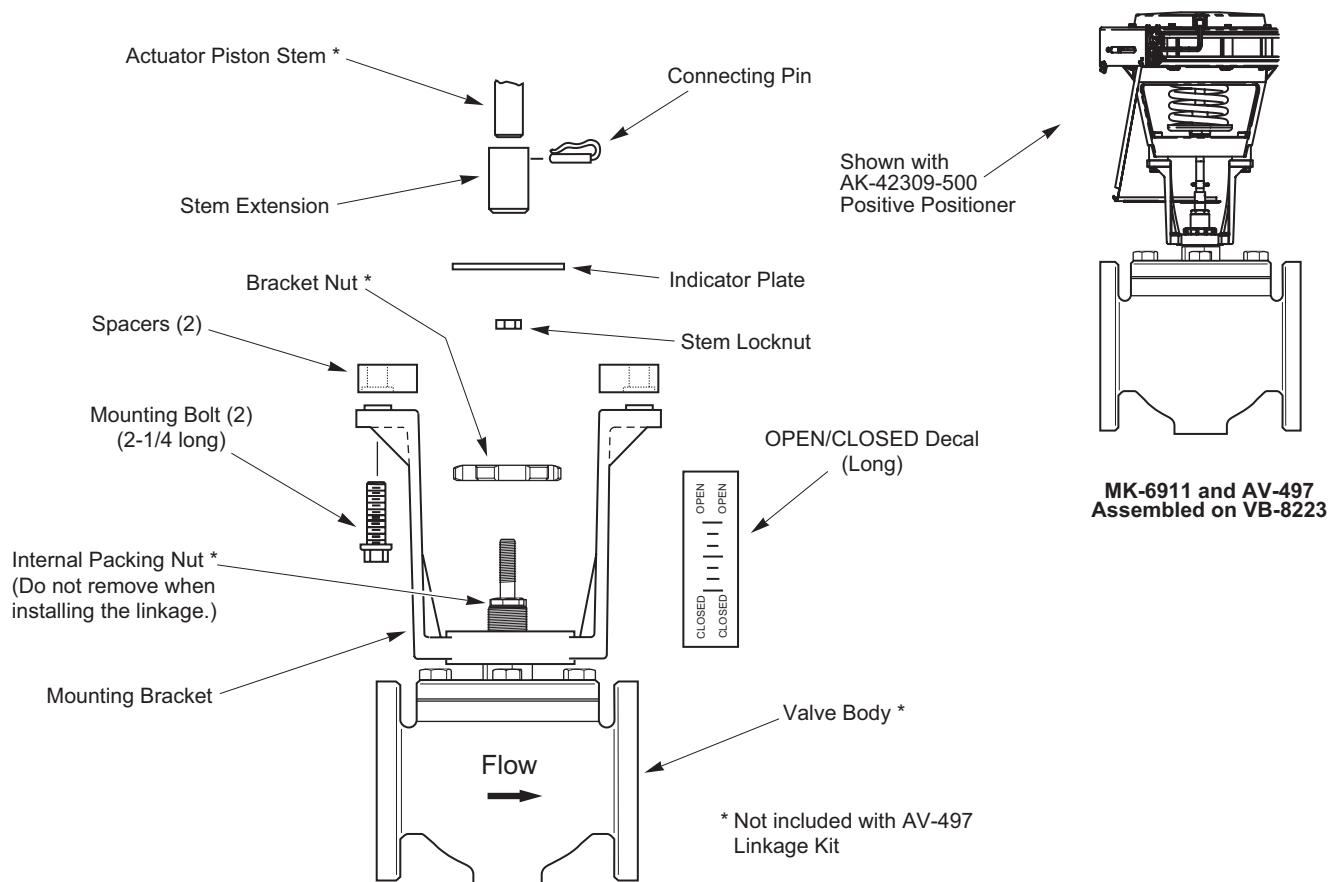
Valve Linkage Assembly for MK-6911 Actuator on 6" VB-8223 Valve.
